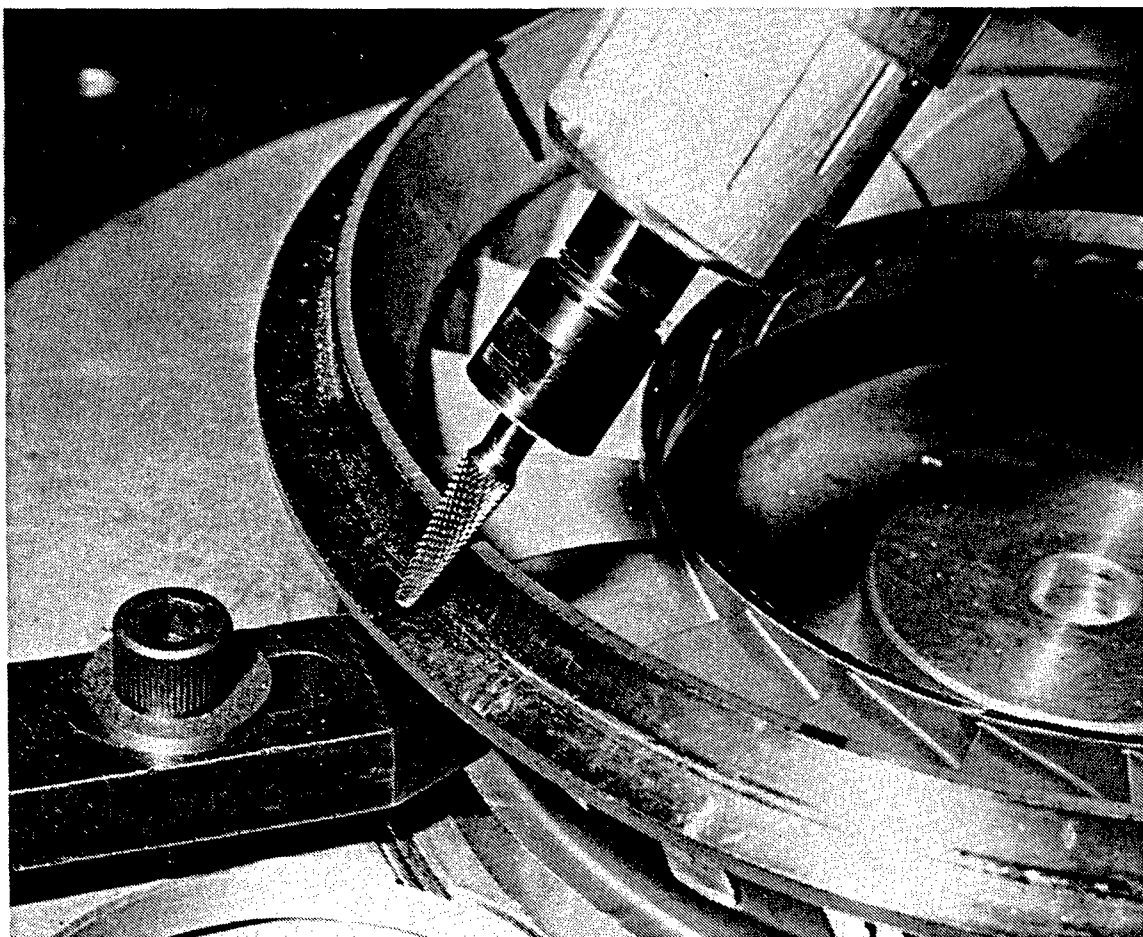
Deburring Outer Edge, Second Stage Nozzle Assembly
